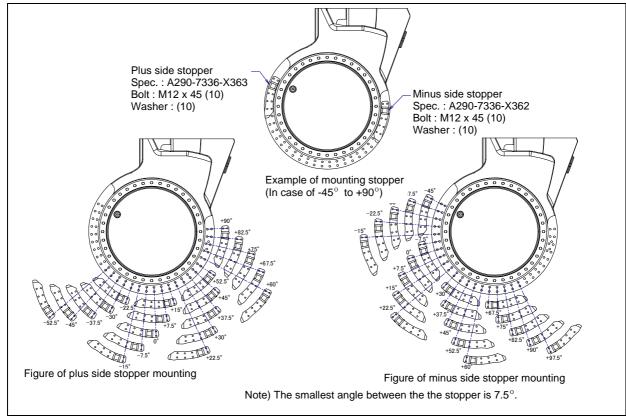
(d) Mounting of J2-Axis adjustable mechanical stopper (Option) (M-2000*i*A/2300/1700L)
